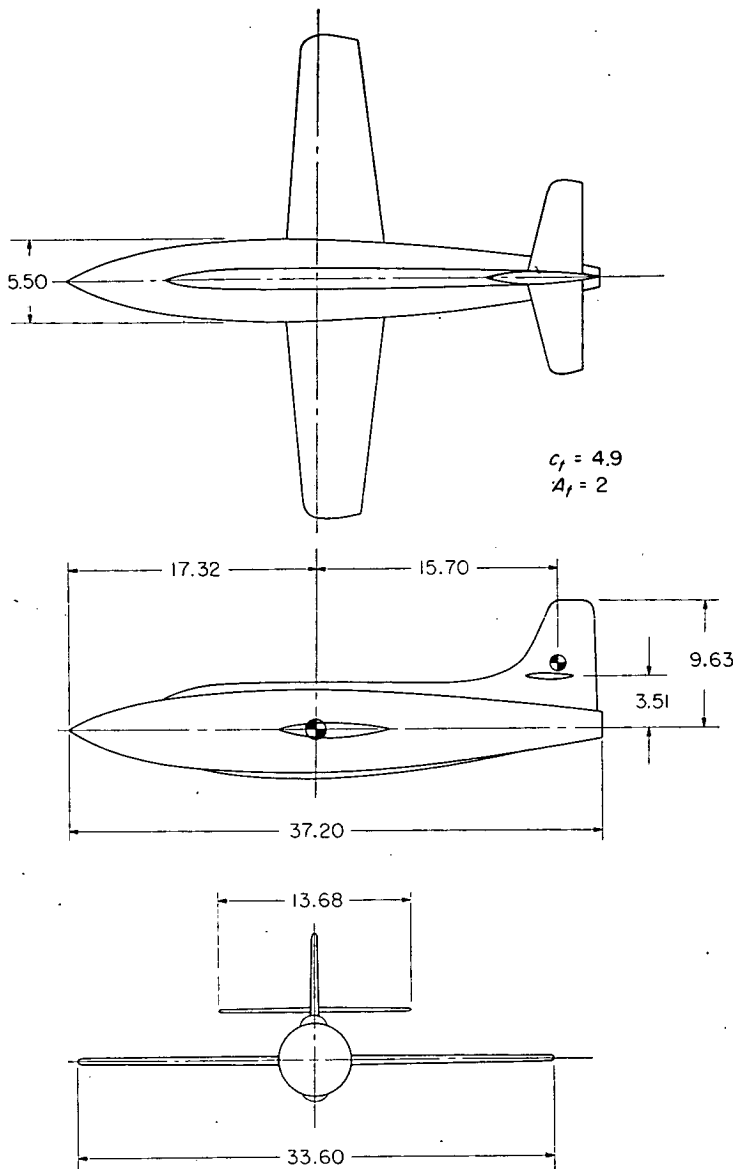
Drawing of model tested. All dimensions are in inches.
